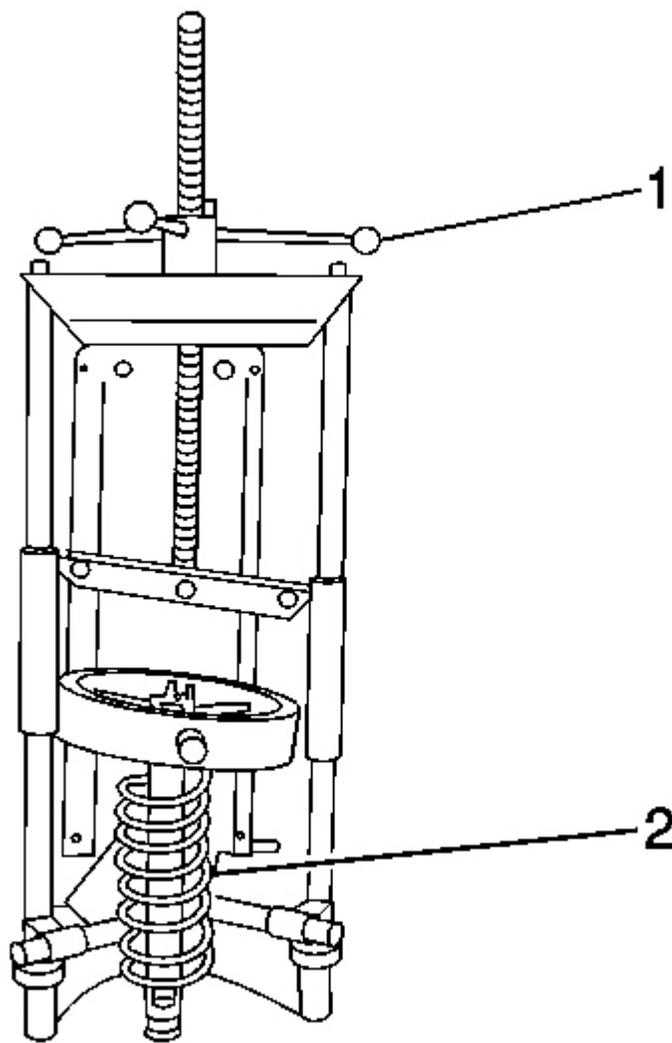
View Of Compressor Forcing Screw & Coil Spring
